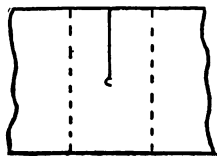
Diagram showing sheet prepared for demonstration of tensions produced during the welding operation.
